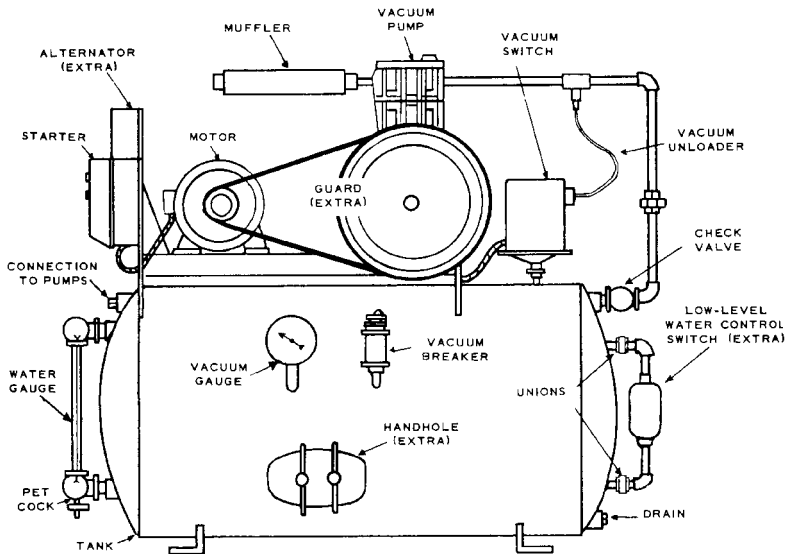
Combination dry reciprocating-type vacuum pump and vacuum tank (Apc/Valve and Primer)
